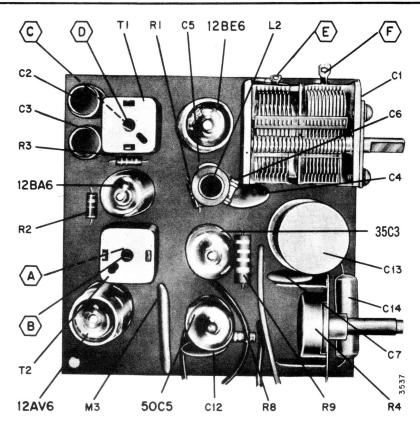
Top View of Chassis Showing Location of Components and Alignment Points.
